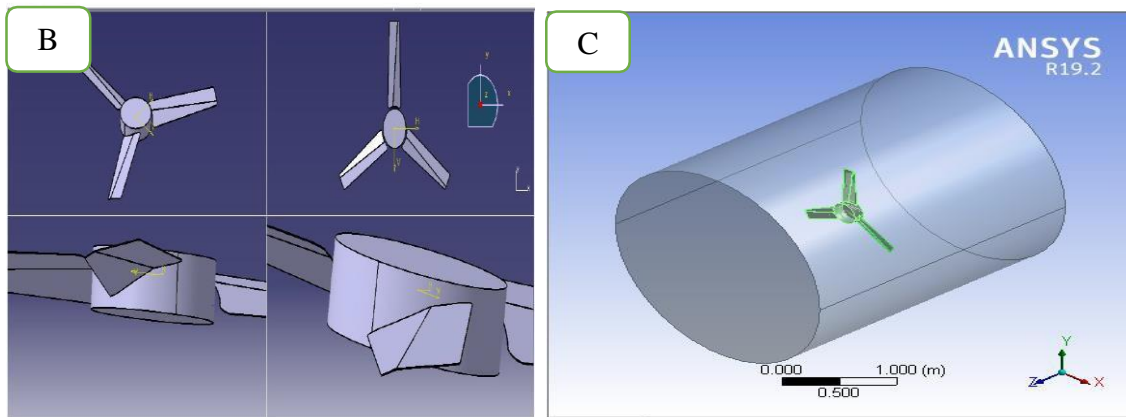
Ceiling fan blade geometry used for structural and CFD analysis
